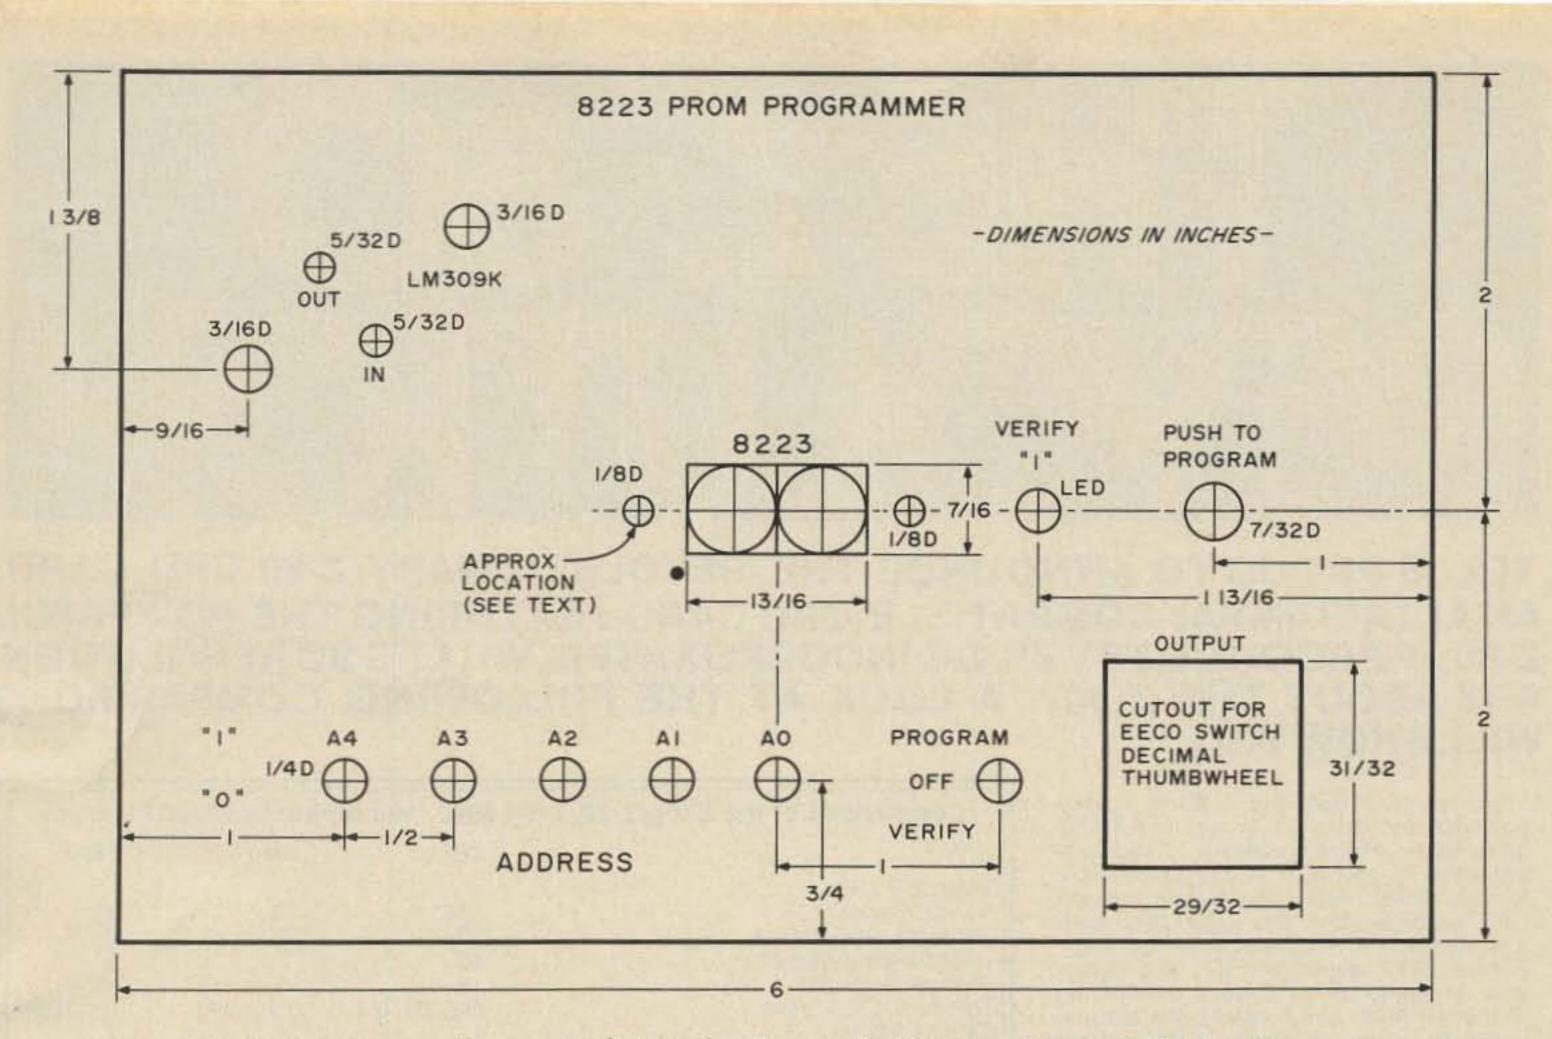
Parts layout of top panel (full size) with suggested labeling. Hole for LED should ensure tight press-fit.
